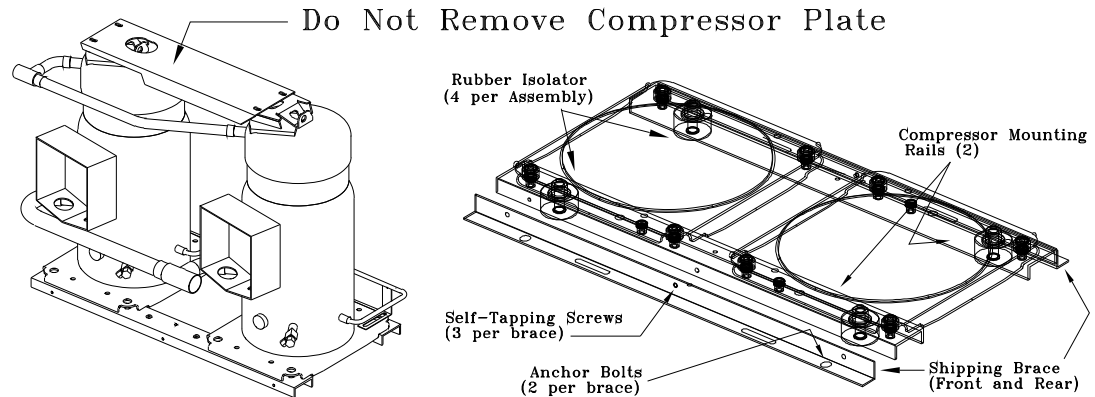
illustrates the location of each tiedown bolt and rubber isolator bolt for the compressor assembly in each circuit. Refer to the illustration and the following discussion to locate and remove the fasteners.
